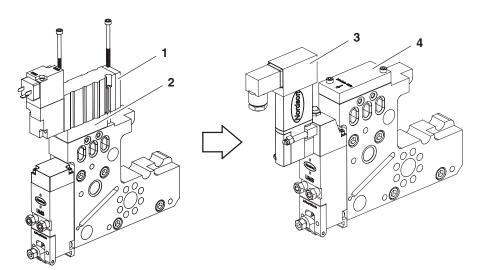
Example of a conversion from a manifold-mounted solenoid valve to a flange-mounted solenoid valve
